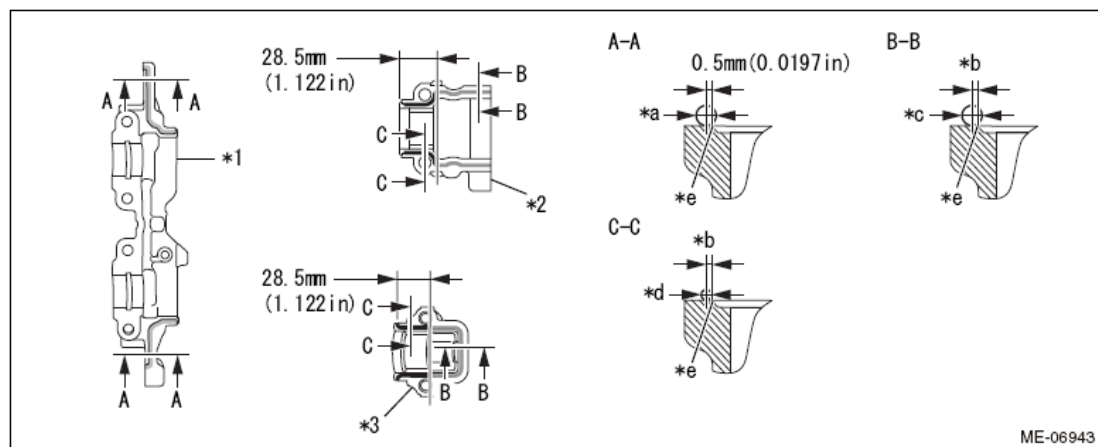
Identifying Intake And Exhaust Camshaft (Bank 1 Side)
